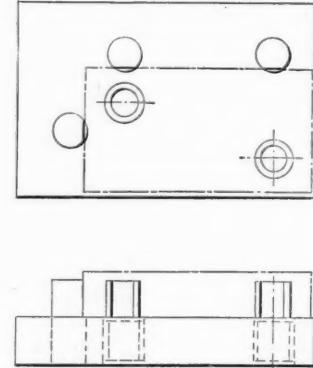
First Improvement of Plate Jig: Locating Pins Inserted.
